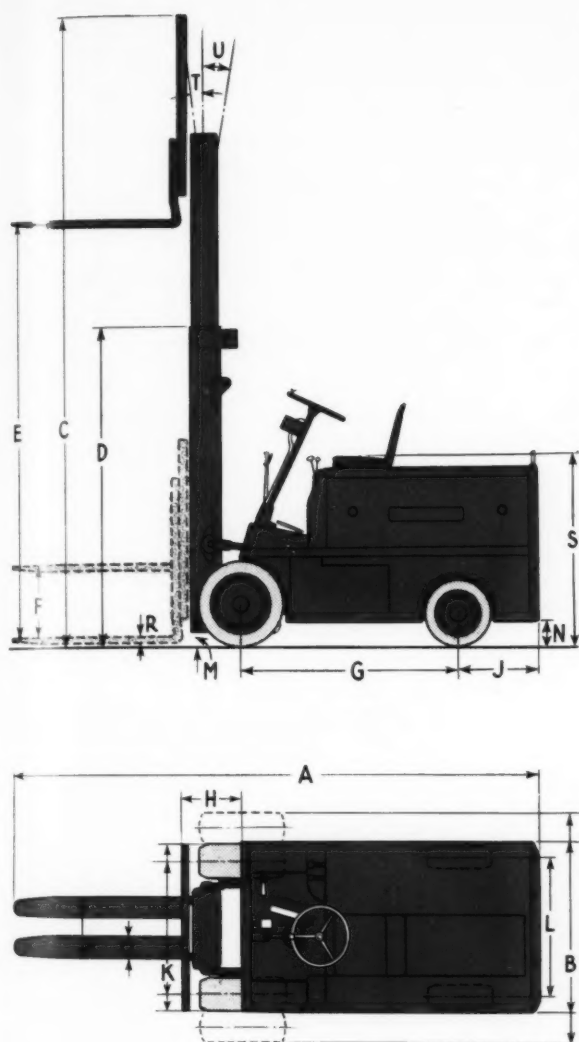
Principal dimensions, in inches, of 624E 'Stacatruc' fitted with standard 42-in forks
